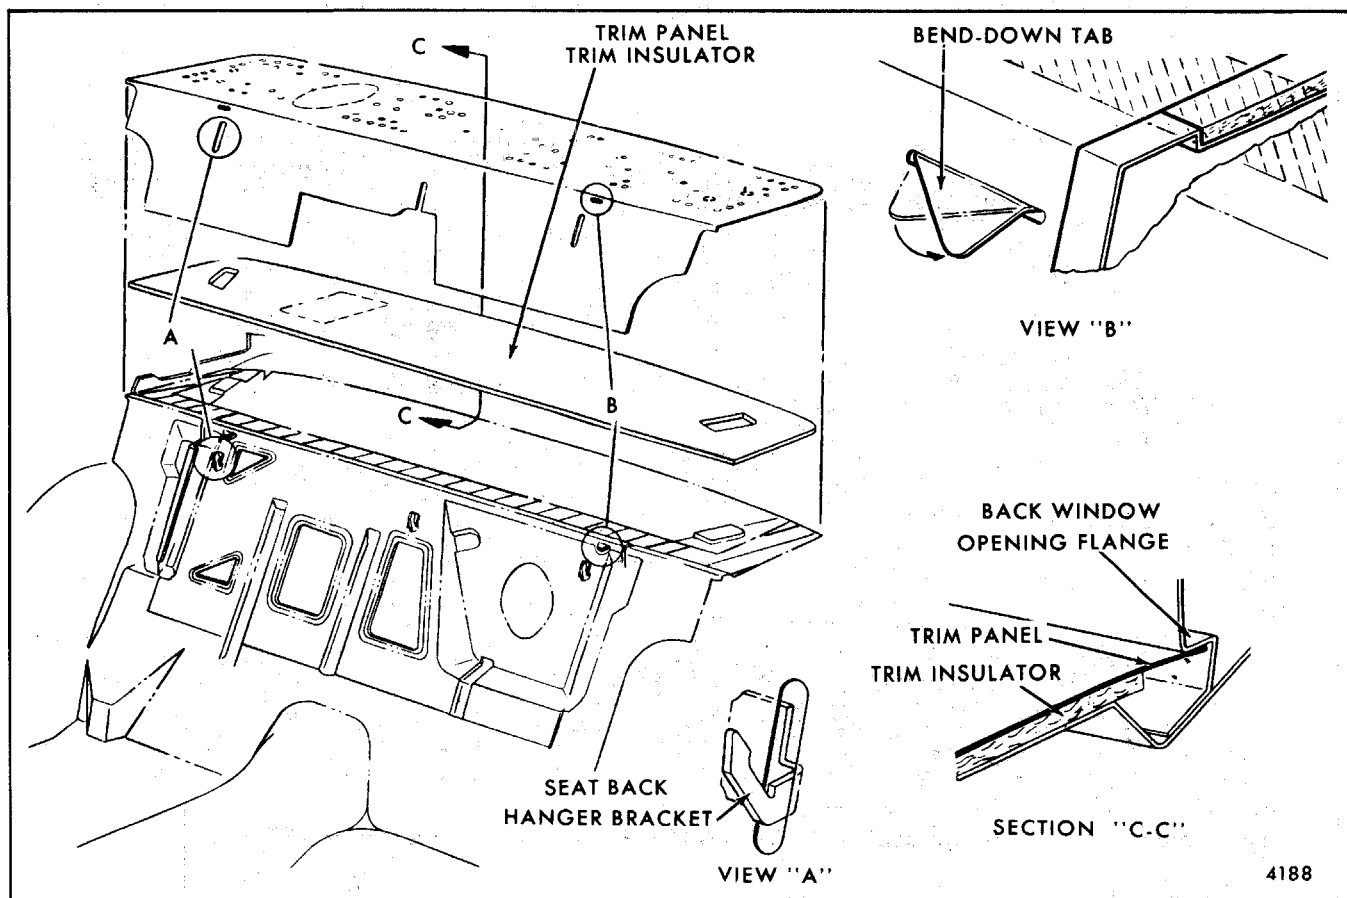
Rear Seat-to-Back Window Trim Panel and Insulator - Typical "H-11" Styles
